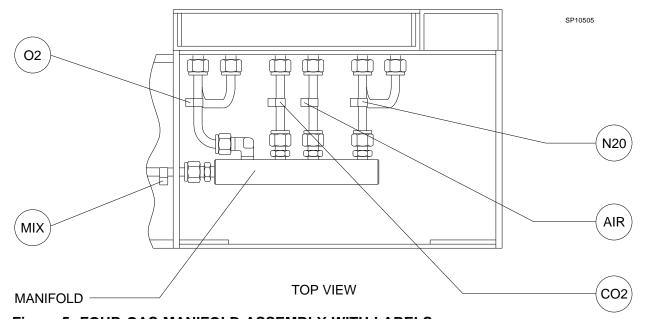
FOUR GAS MANIFOLD ASSEMBLY WITH LABELS
